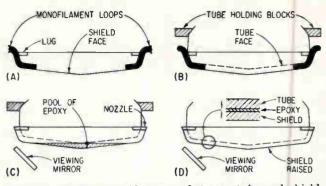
Fixture provides space between tube and shield. After bonding resin is inserted, shield is raised to complete lamination
